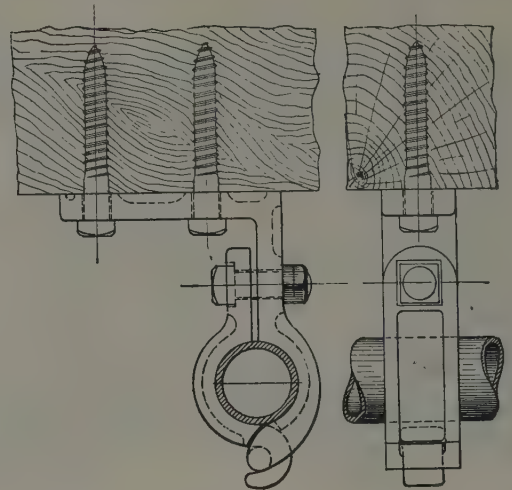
Acme Pipe Clamp for Use on Bottom of End Sill.
